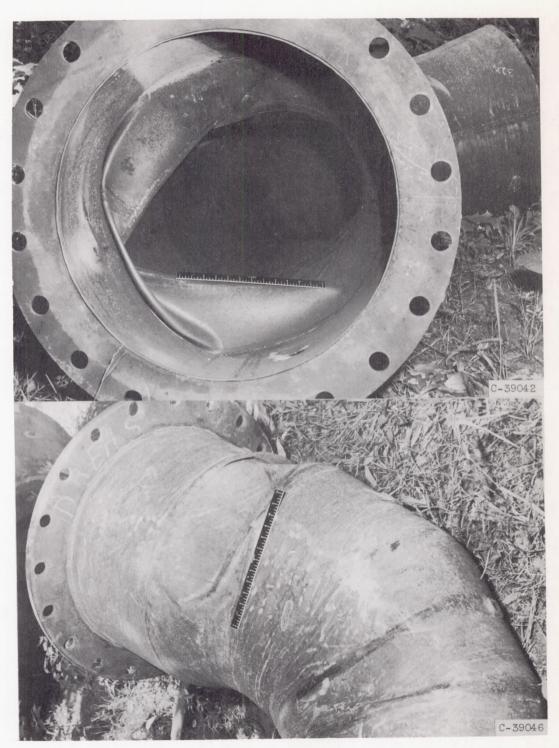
Damage to multisectioned elbow constructed of 16-gage steel (fig. 7(c)).
